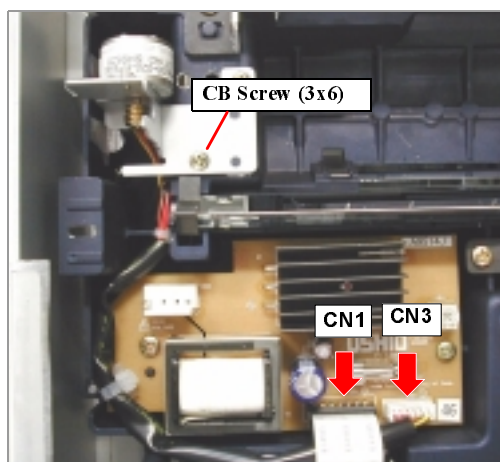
“MOTOR ASSEMBLY, FOCUS” Removal (1)
